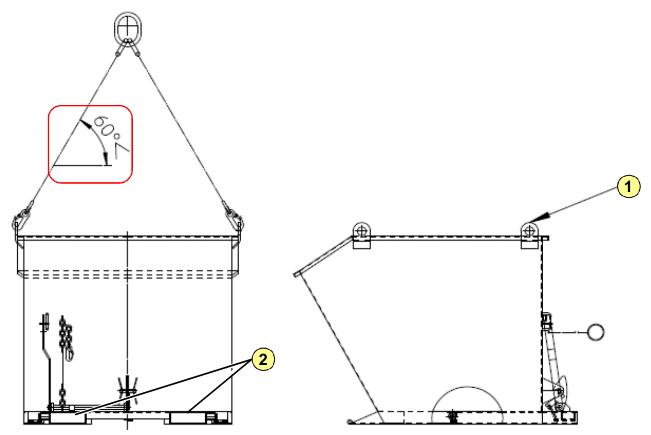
Tilting swarf container assemblies with lifting accessories and crane lugs
